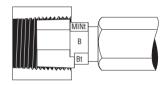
Checking minor diameter truncation with 6 step plain Plug Gages.
